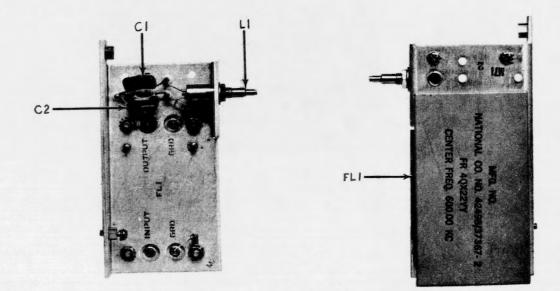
600-Kc Filter A1A18, Parts Location
